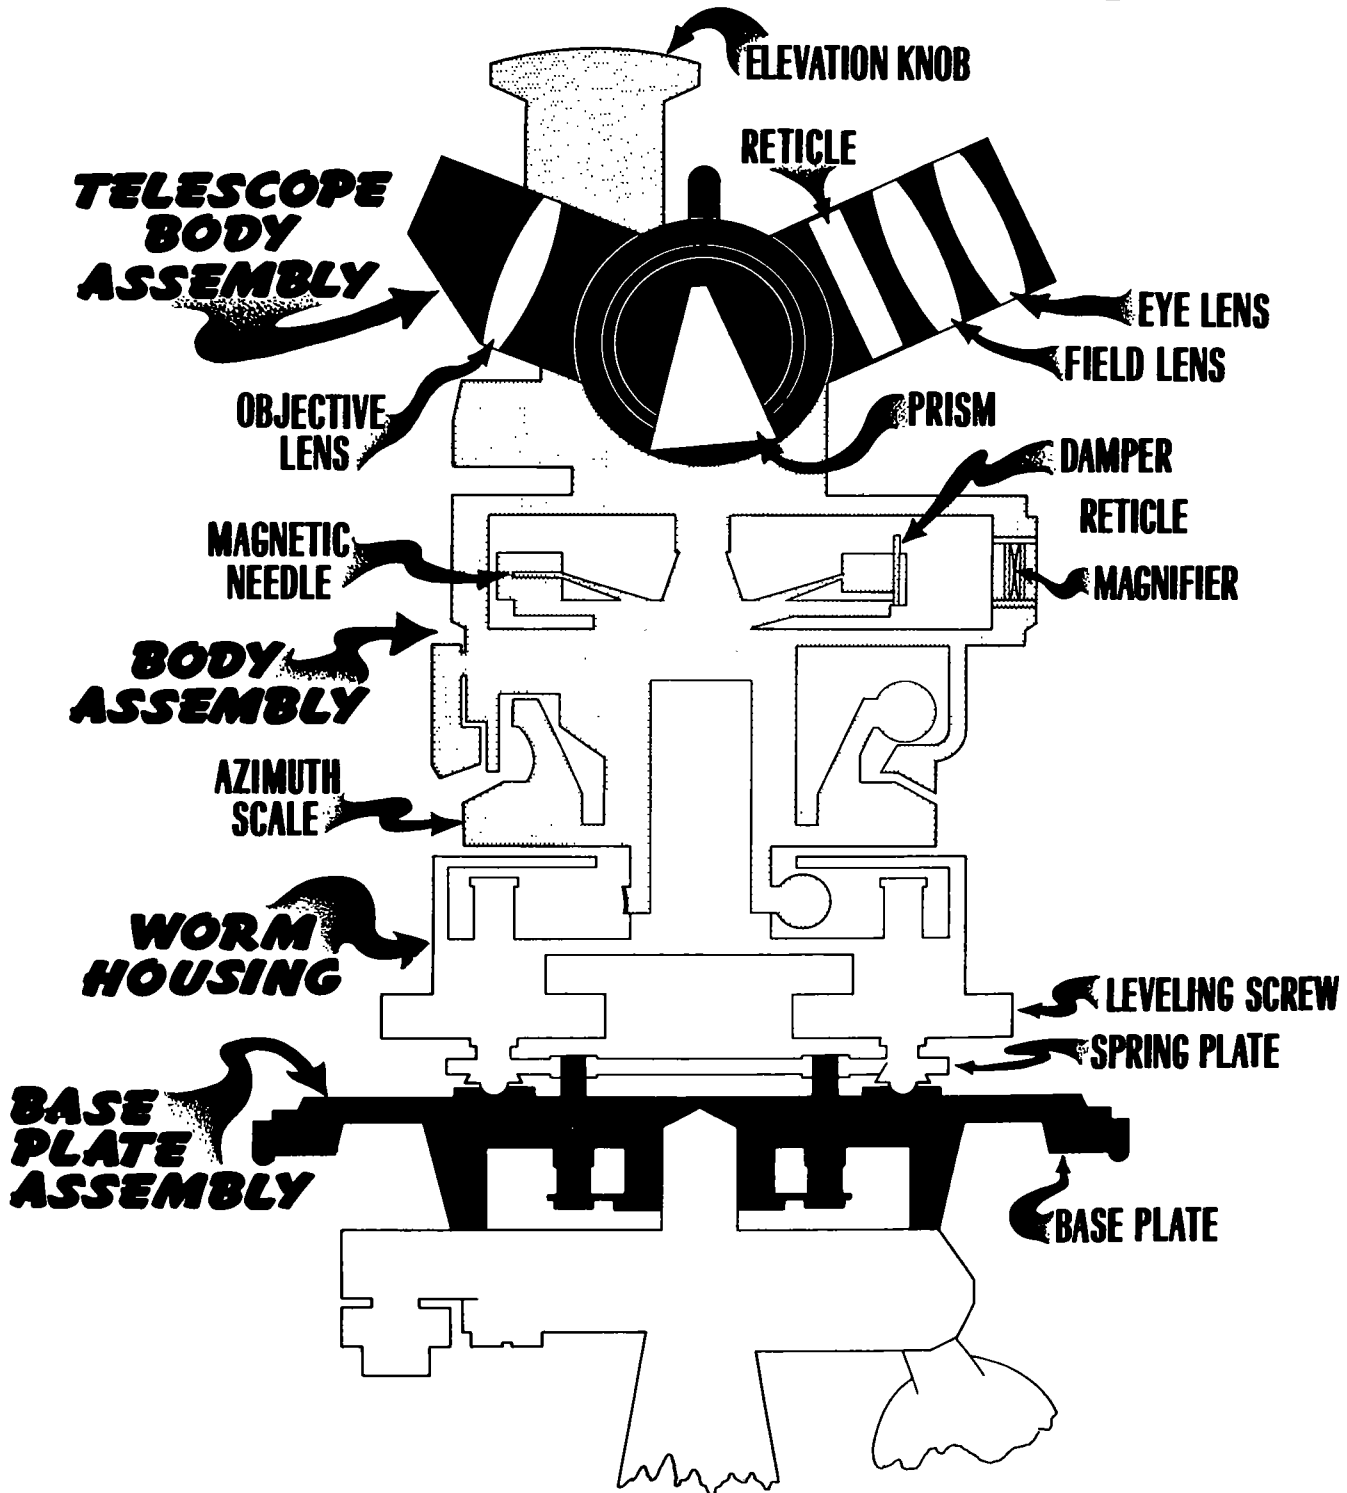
Cutaway drawing of aiming circle showing composite parts.
